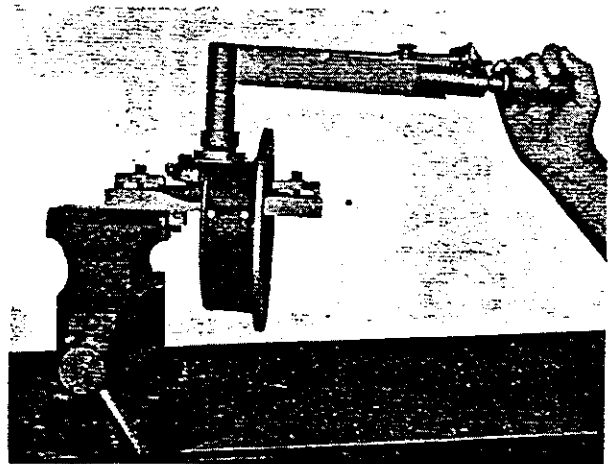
Breaking Bearing Retainer Spanner Nut Torque
